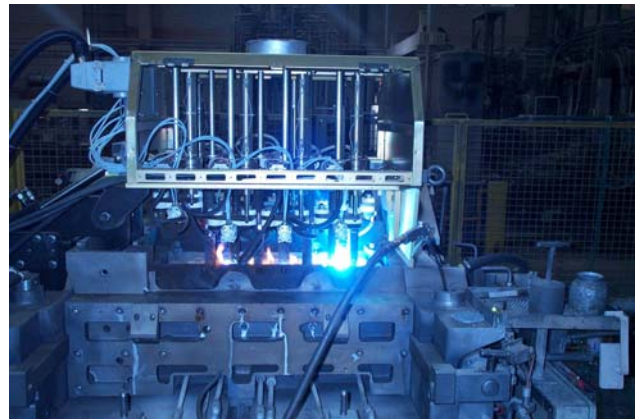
PTC System with Exhaust Hood in Semi-Permanent Molding Machine
